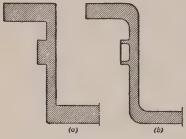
Redesign of Cylinder Casting. Improved Design Shown at (b).
